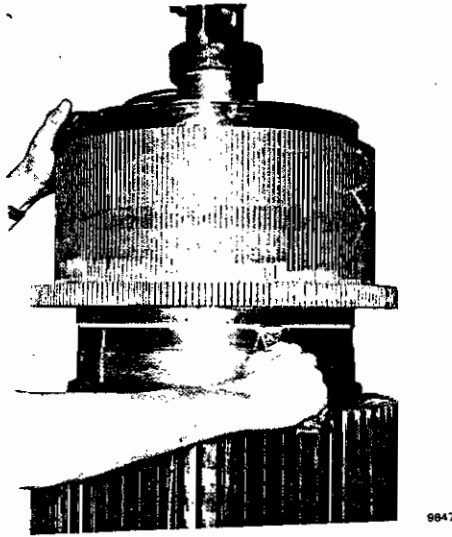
Removing Excess Silicone Rubber Compound from Under "V" Ring
